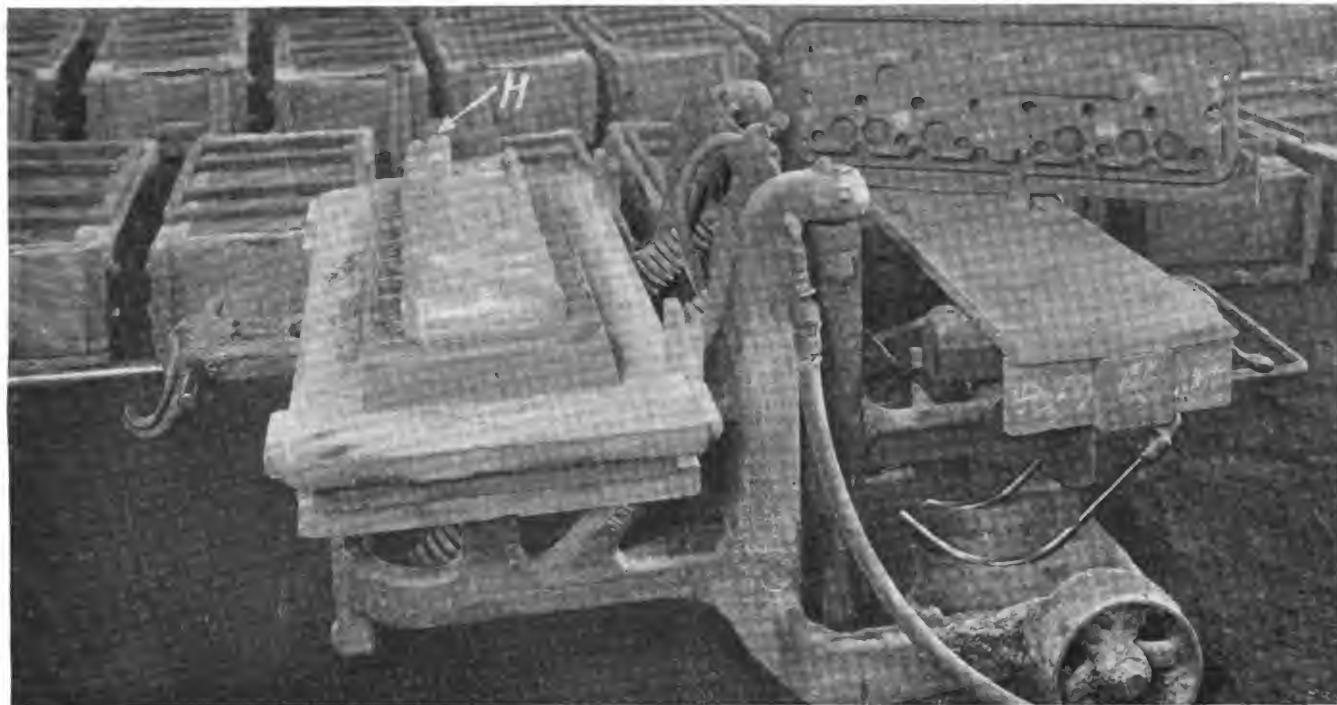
Molding machine, inner and cover core for molding the cylinder head shown in Fig. 3. Note the closed and weighted molds in the background
